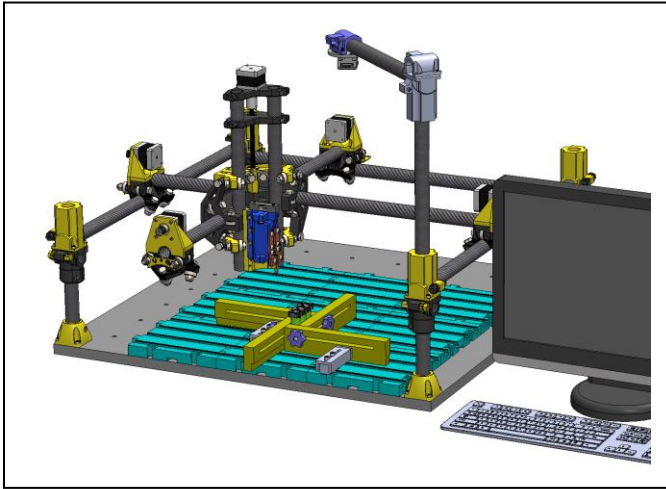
Model of the CNC assembly setup for spot welding of a cylindrical cells.
